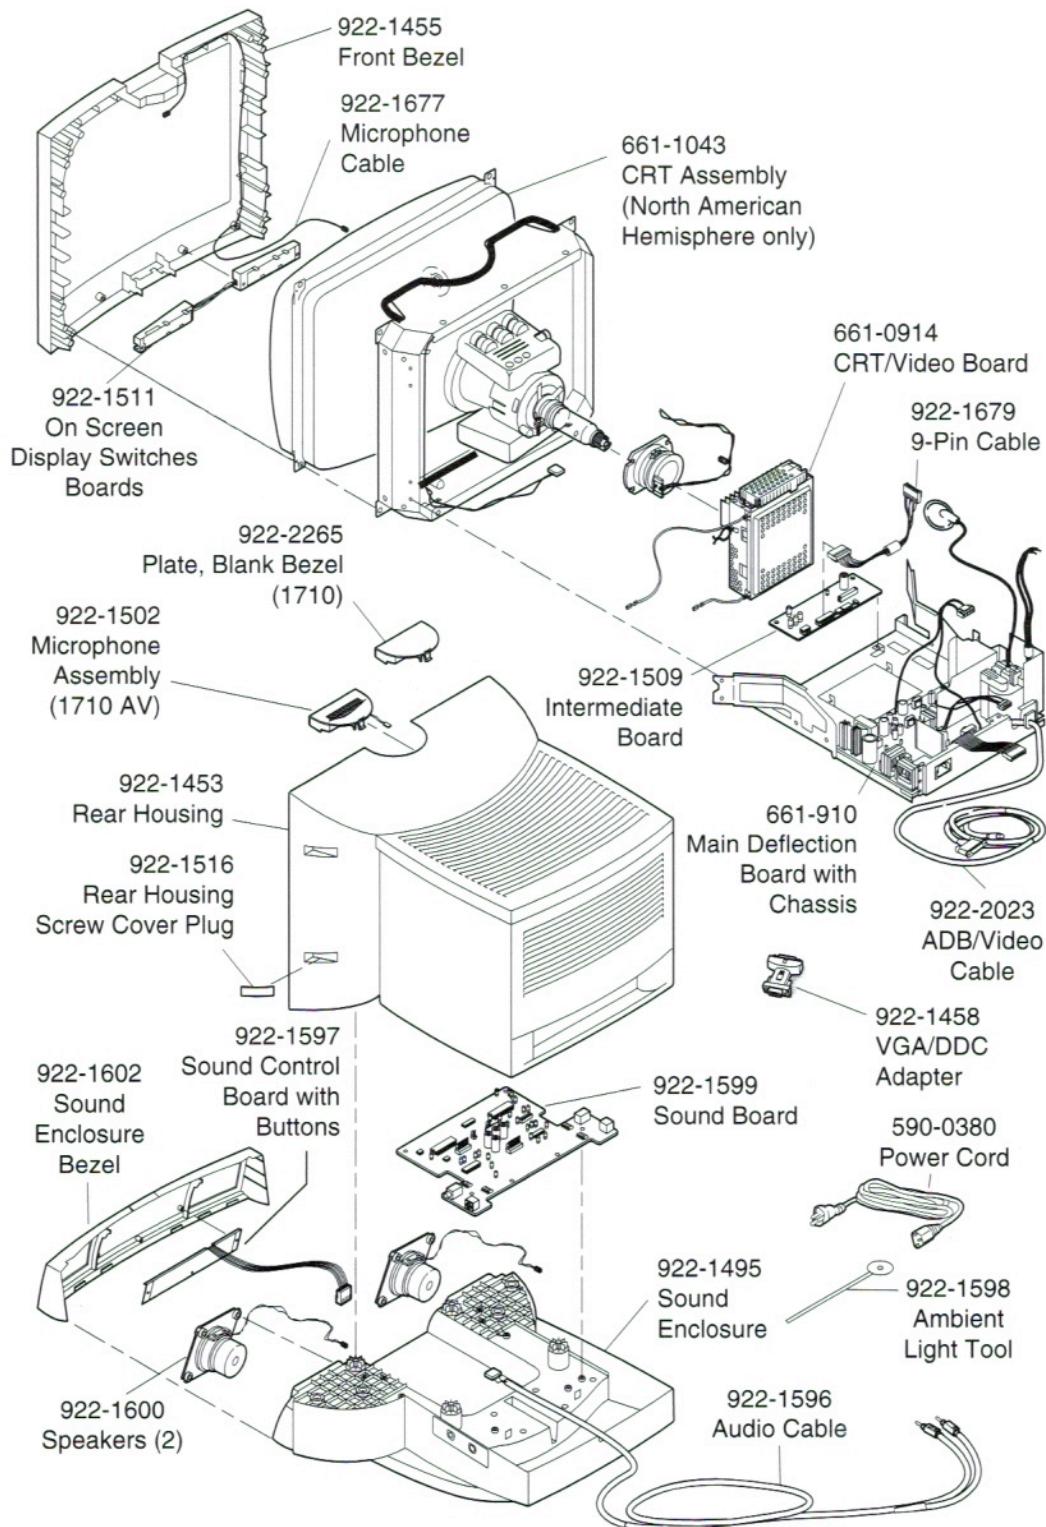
AppleVision 1710 and 1710 AV Exploded View
